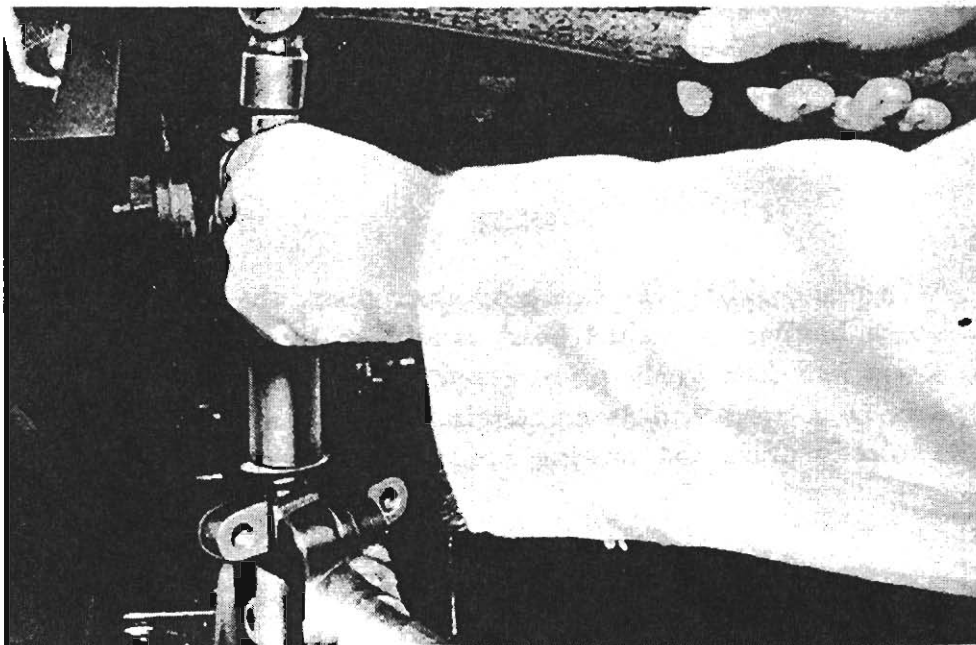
The Grease Retaining Plugs May Be Driven and Expanded into Place with the Driver J-2564-7.
